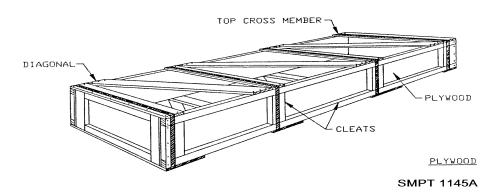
Type II, style A crate assembly (MIL-C-52950).
